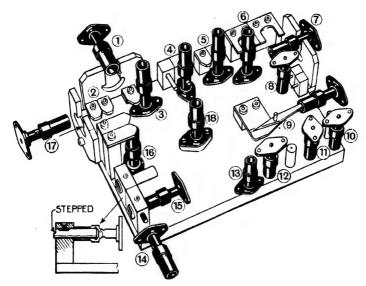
A Typical "Automatic" Inspection Set-up (Courtesy Aircraft Production)
